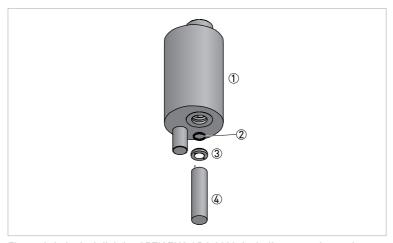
Optical disk for OPTISENS ODO 2000, including mounting tool
